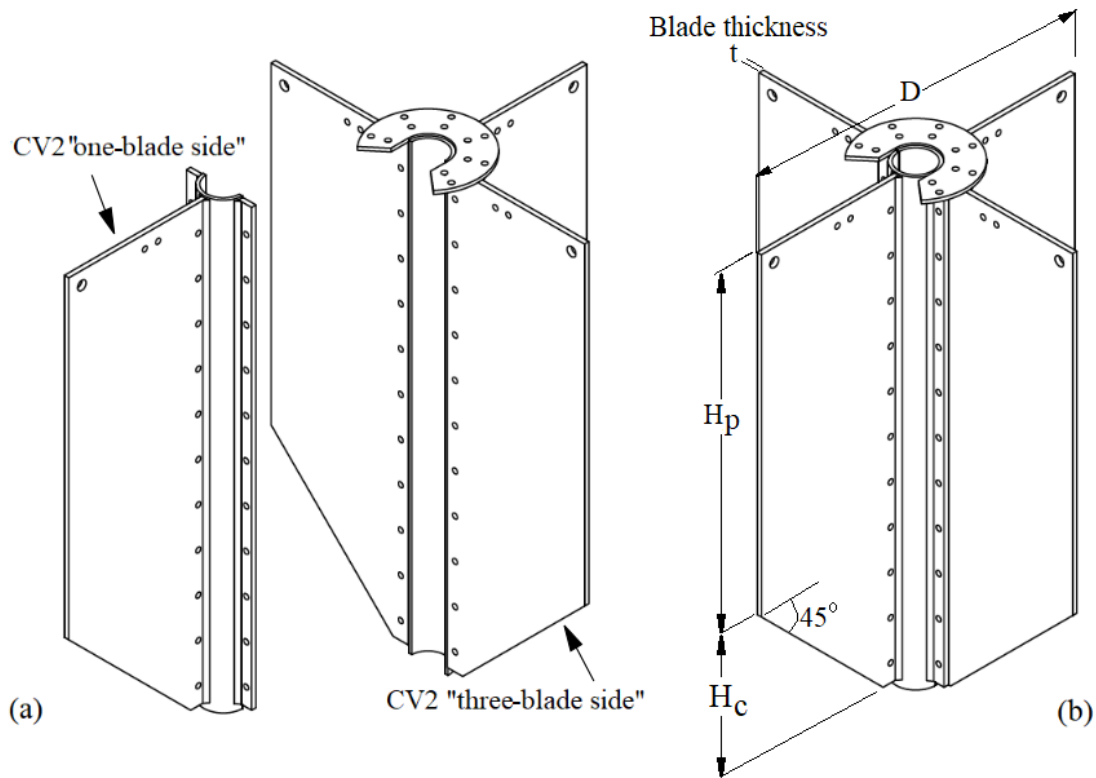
Two-piece Collar Vane (CV2) sides: (a) exploded view of the two pieces and (b) final position (Hubbell Power Systems Inc.)
